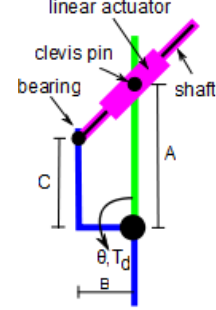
The linear actuator and shaft is connected between the two links using a clevis fastener and bearing. The spring is not shown.
